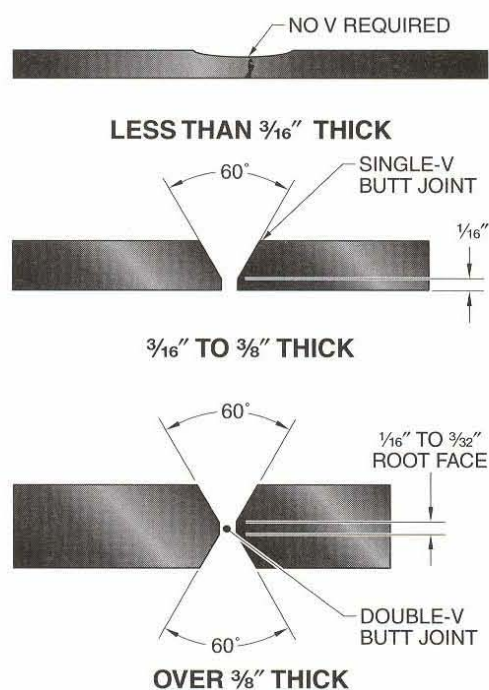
Careful joint preparation is required when welding cast iron.
